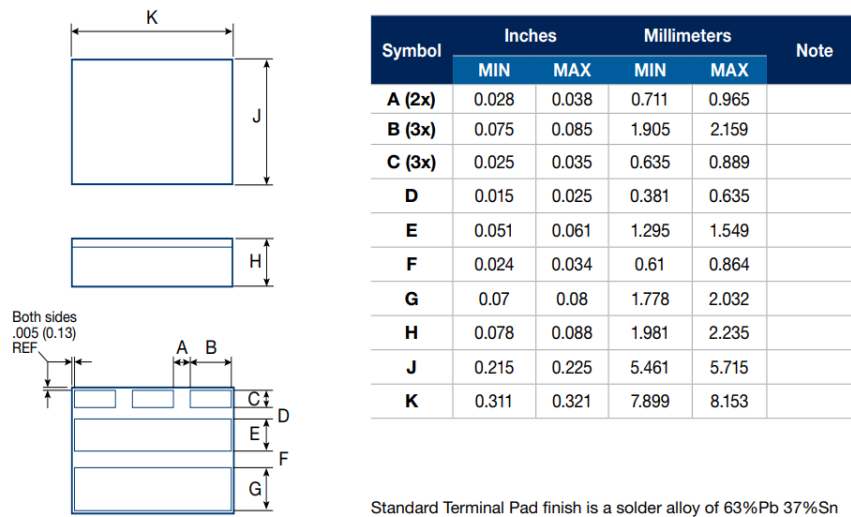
Physical/mechanical dimensions of the EPC Space FSMD-G package.
